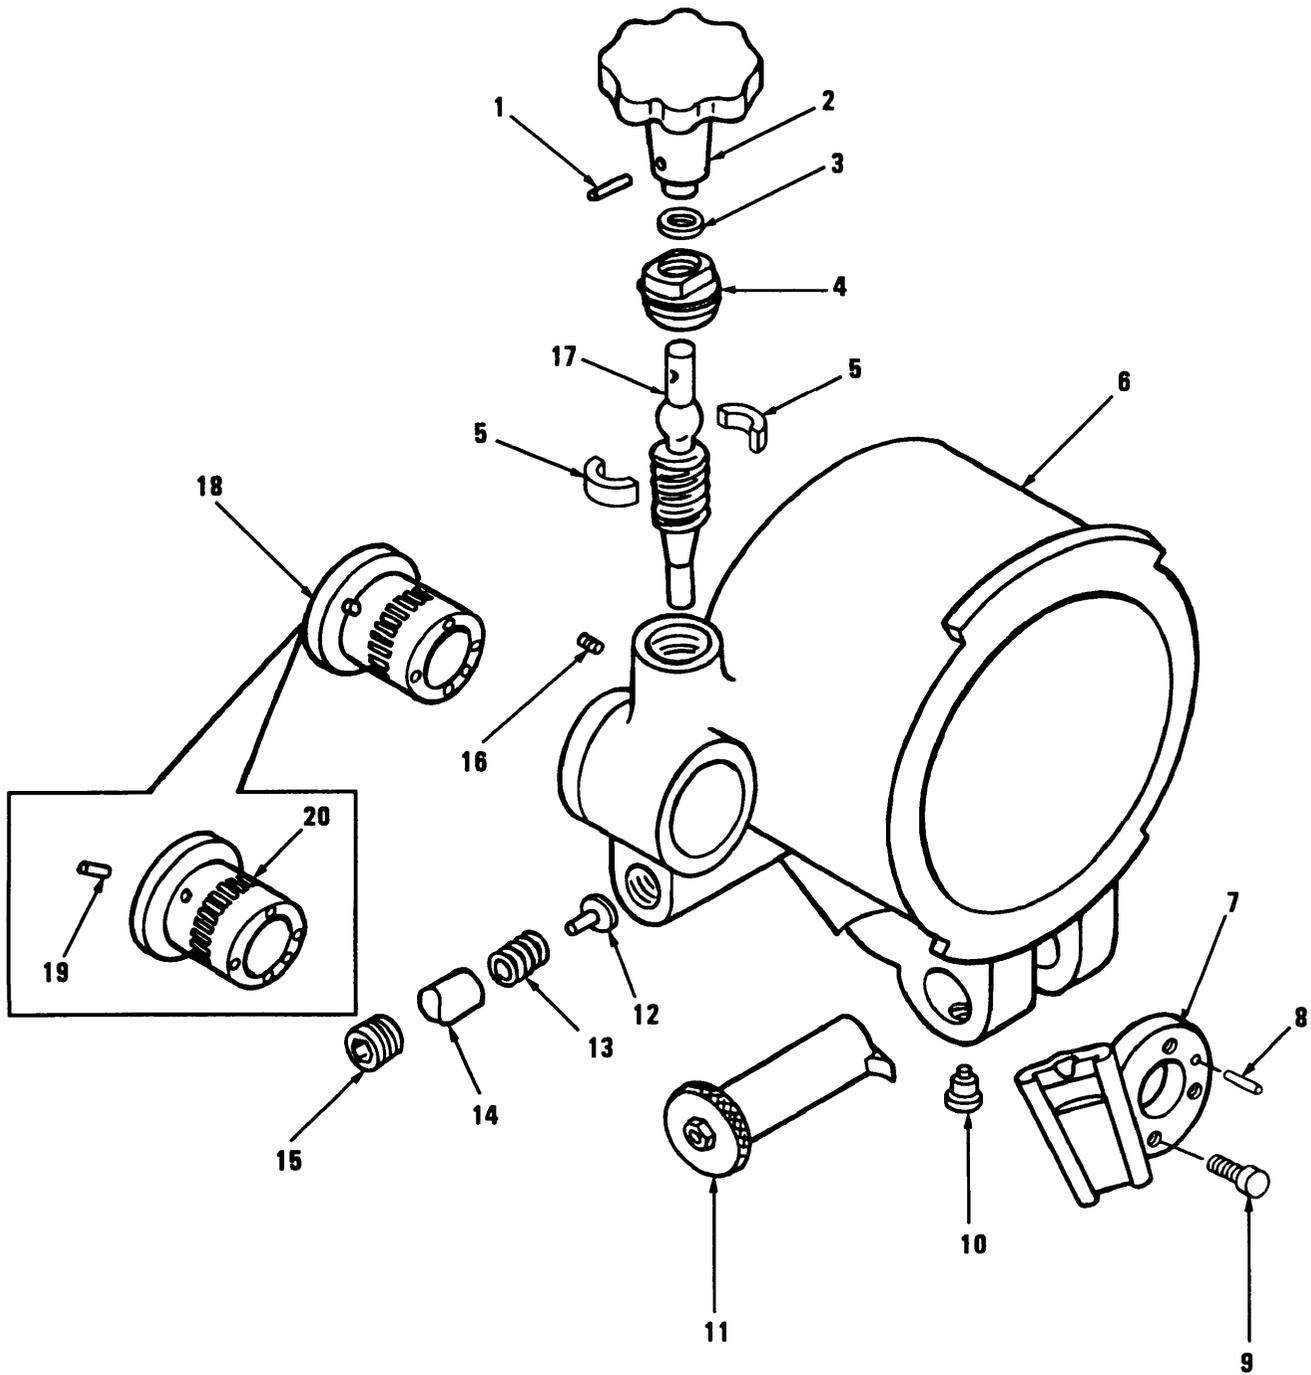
Coupling and Sight Mount Assembly 7144218 and Gear Worm Assembly 7145424.
